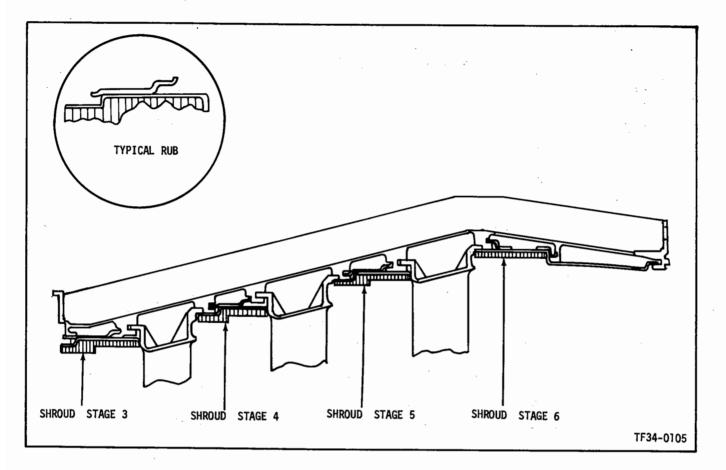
Low-Pressure Turbine (Stages 3 through 6) Shroud Inspection
